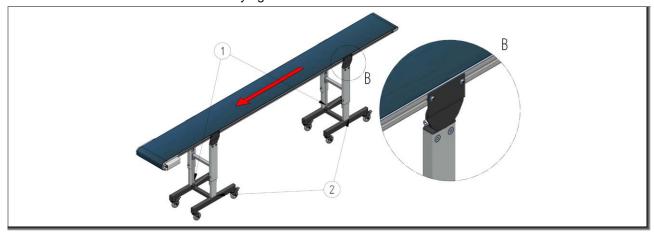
Overall construction assembly conveyor with support HE 050 – HM 480 (typical)
